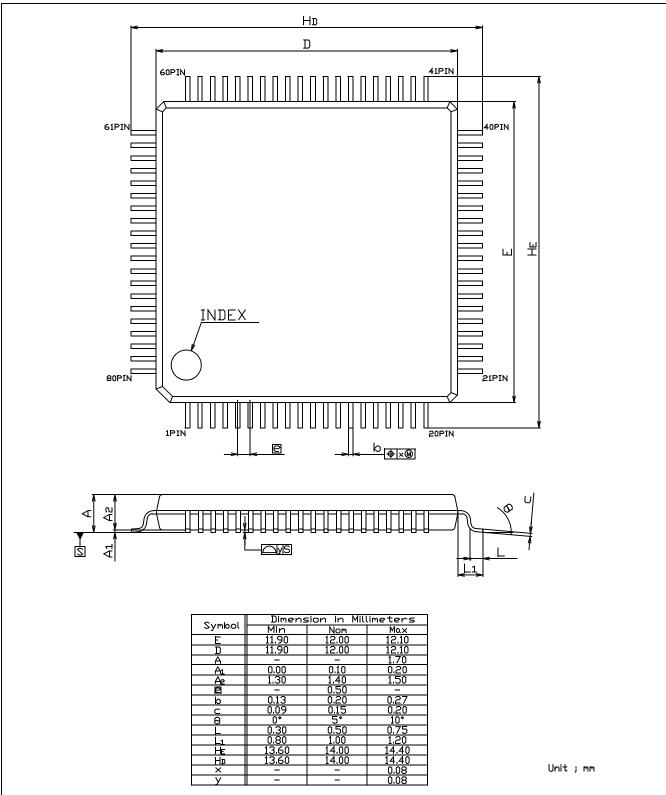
Mechanical Drawing QFP14 - 80 pin
